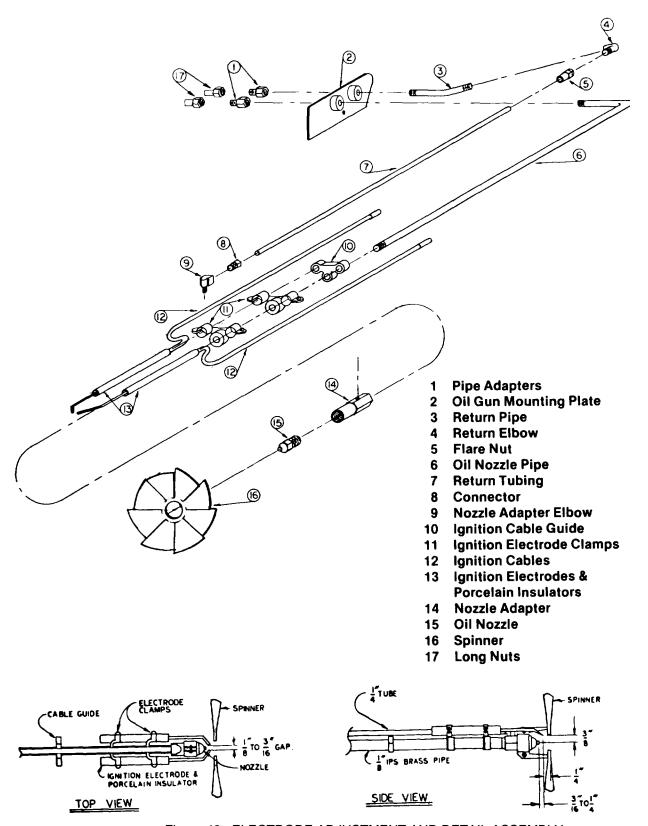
ELECTRODE ADJUSTMENT AND DETAIL ASSEMBLY.
